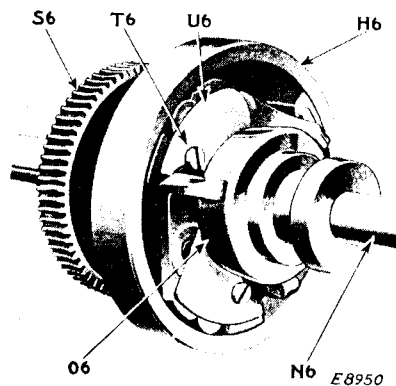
Rapid Feed Clutch Showing Position of Sleeve when Clutch is Disengaged
